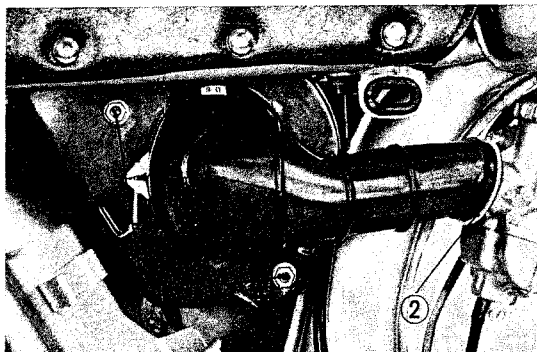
① Mounting nut ② Air cleaner connecting clamp
